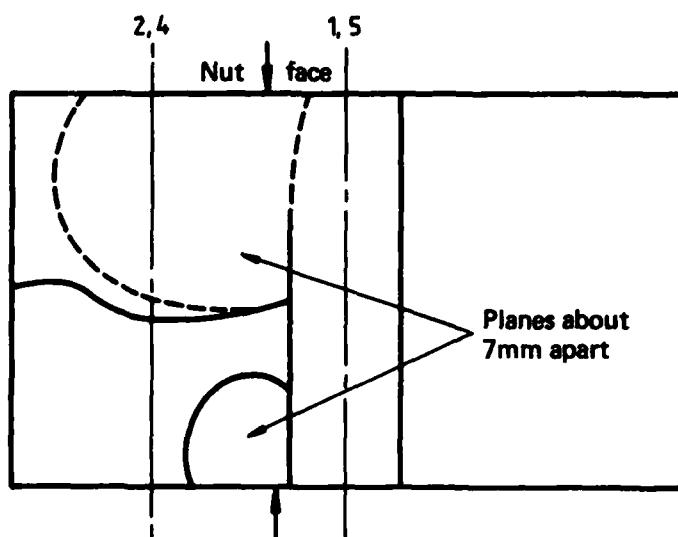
(d) FRACTURE SURFACES: SPECIMEN TYPE (D)
